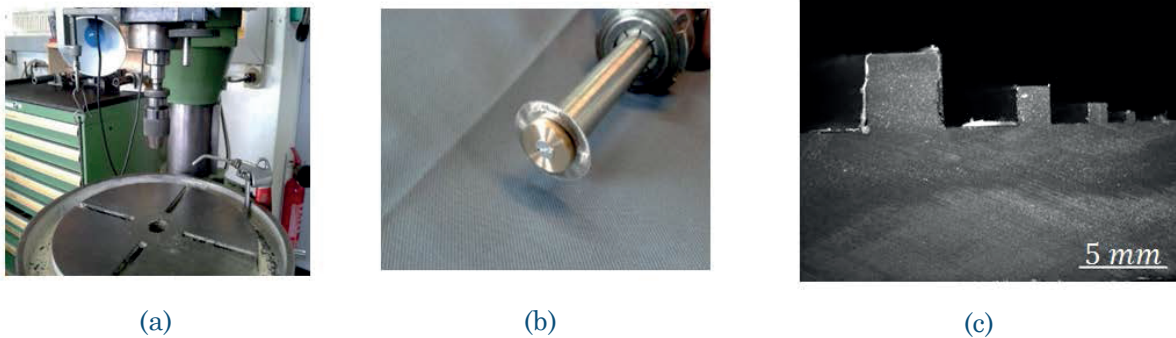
Milling machines for preform patterning. (a) mechanical milling machine (FLOT SB30V), (b) rotational end-mil to create $250\ \mu\text{m}$ grooves on preforms, (c) cross-section of a preform with different square structures.
